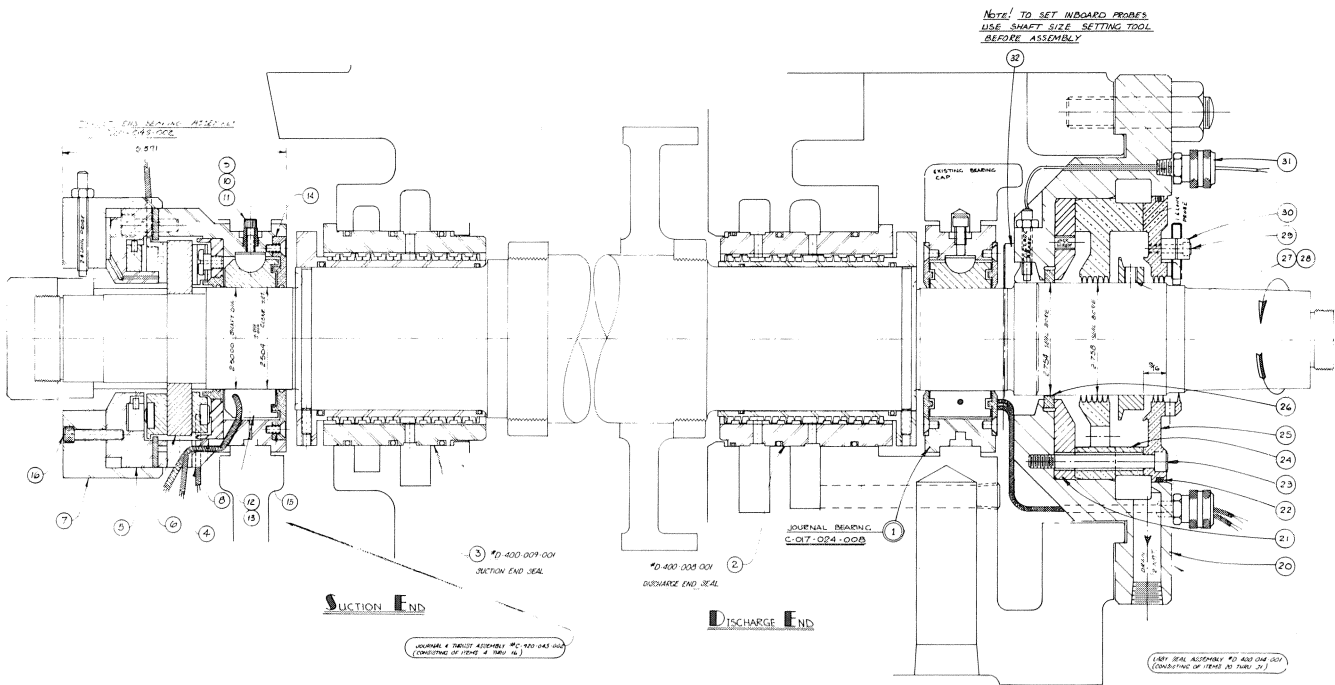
New Tilt Pad Bearing and Labyrinth Seal Conversion.
